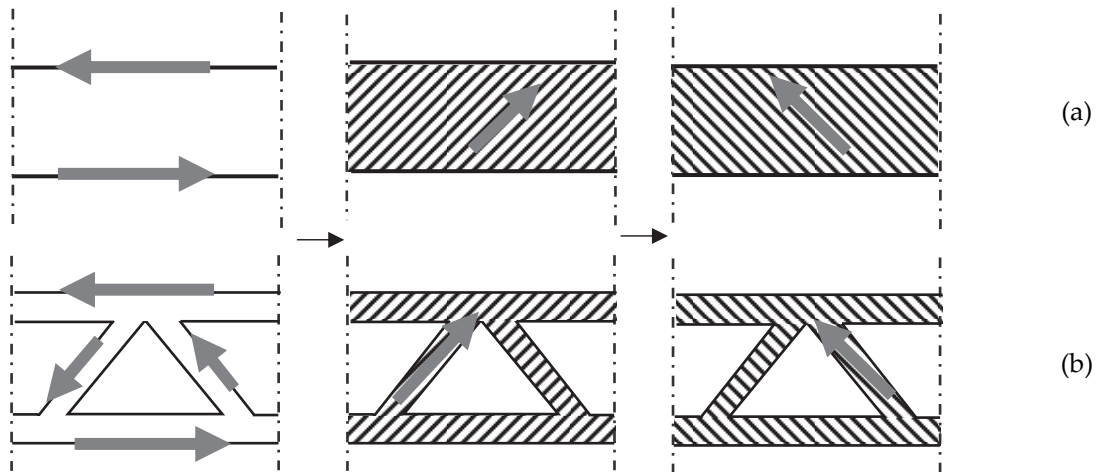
3D-printing process: disposition of subsequent layers during the printing process for (a) DG samples and (b) beam samples.
